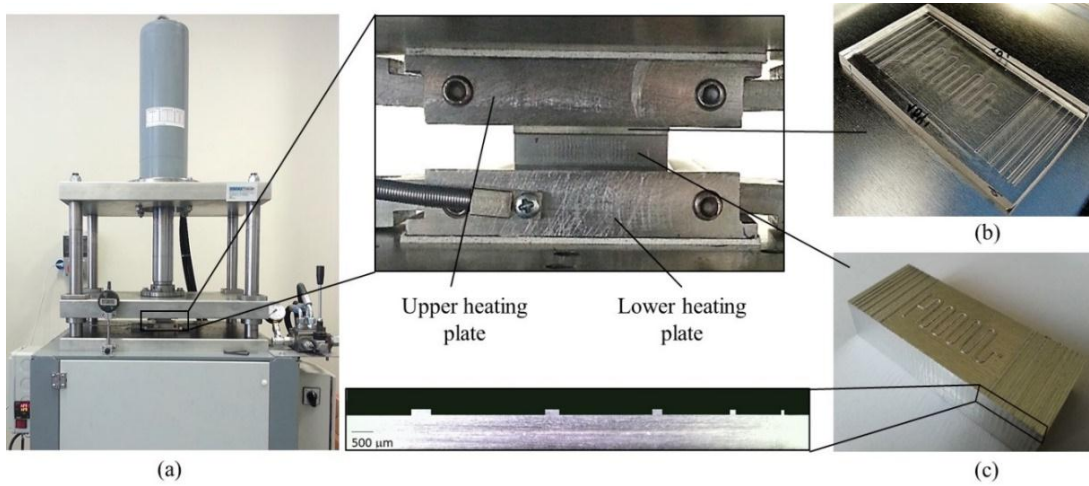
(a) HE press and heating plates, (b) embossed chip, (c) fabricated mold and its' protrusions [66].
